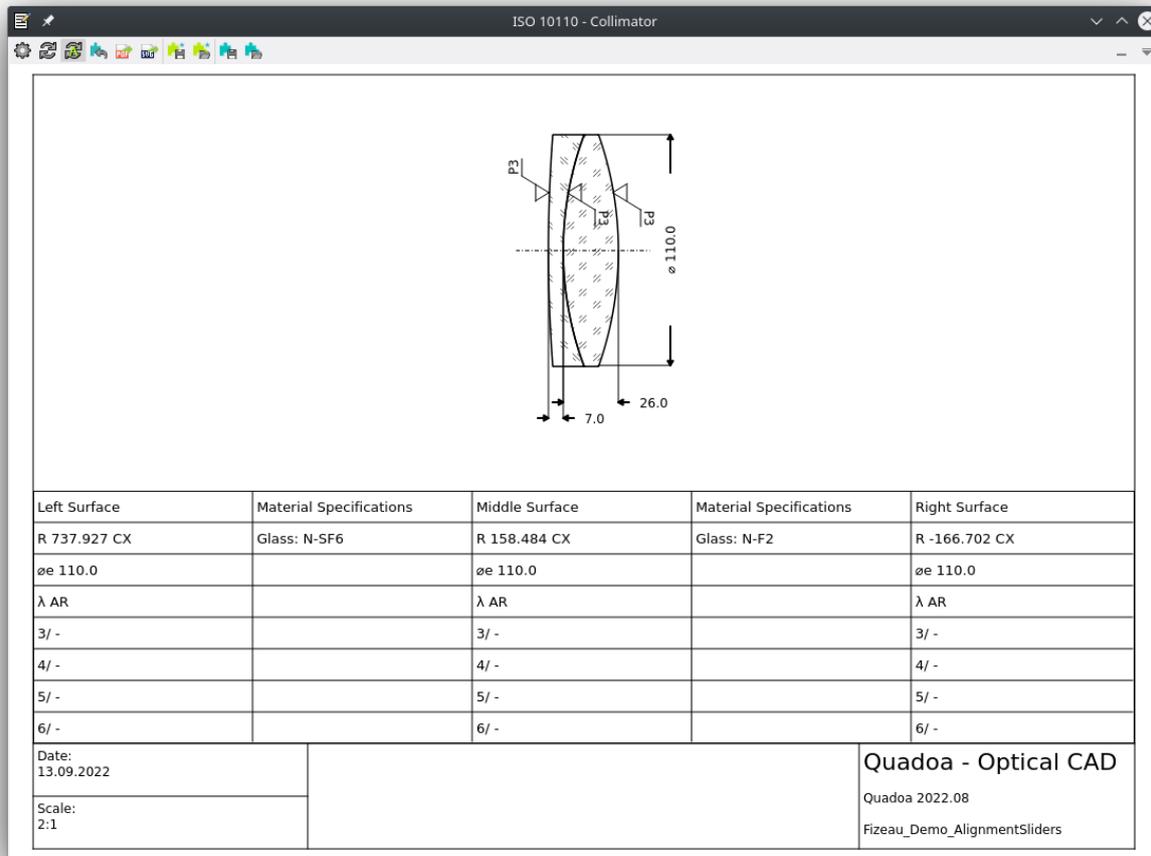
ISO 10110 Technical Lens Drawing Wizard.
